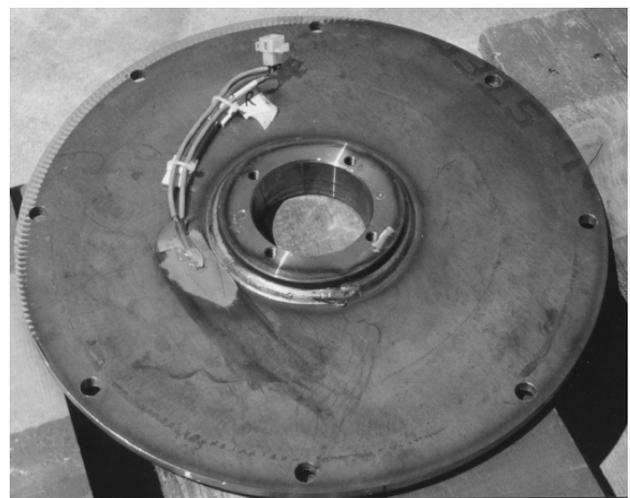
Test end disc showing cruciform (fillet) weld between end disc and hub. Strain gages attached to monitor stresses induced during set-up and loading.
